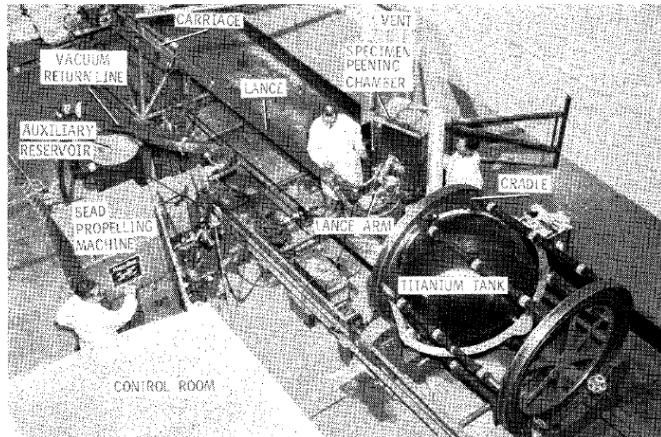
Glass Bead Peening Equipment and 51-inch Diameter Tank.
